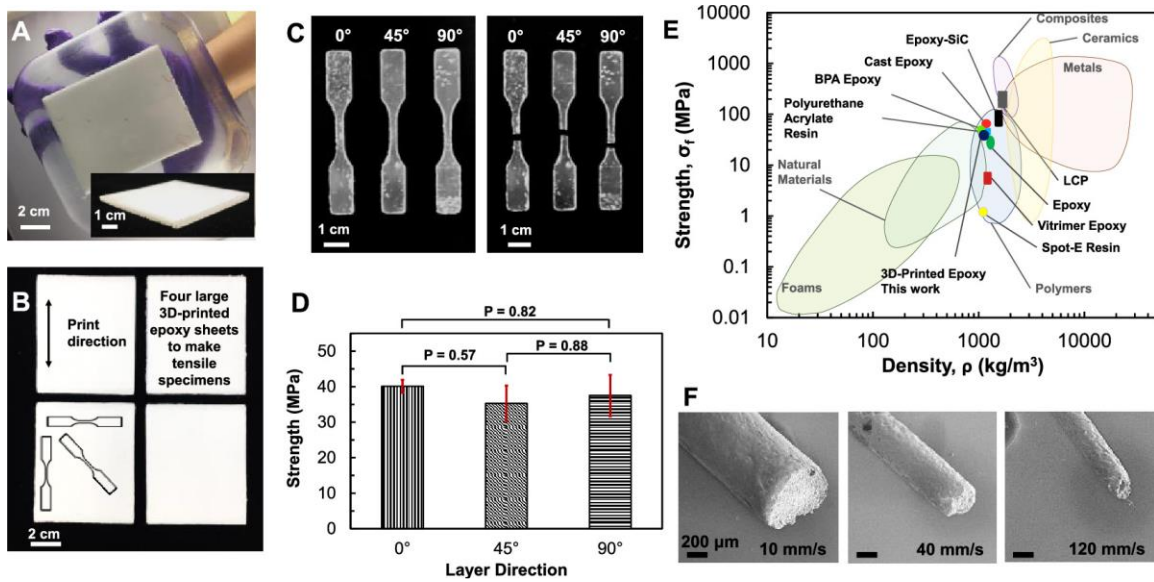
Isotropic mechanical properties of the printed structures. (A) An image of a 3D-printed epoxy sheet for the tensile test inside and outside the bath. (B) Tensile test specimens were punched out from the printed sheets using an ASTM standard die in different orientations with respect to the print direction. (C) Photos of the dogbone specimens before and after the tensile test. (D) Strength for samples with different printing layer directions. (E) An Ashby plot for strength vs density comparing the properties of the printed epoxy in this work with the literature (details are provided in the Supporting Information). (F) The SEM images of the filaments printed in three speeds (10, 40, and 120 mm/s).
